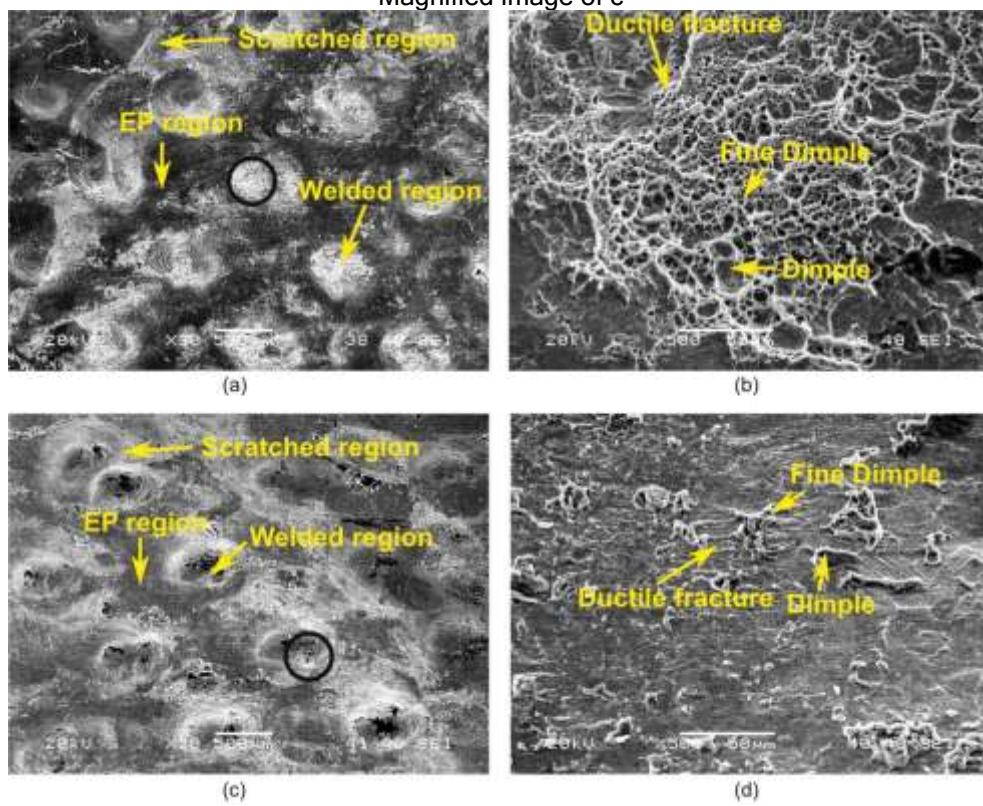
Fractured surfaces of ultrasonic welded specimens in EP surface condition (a) Al side surface with 30X zoom; (b) Magnified image of a; (c) SS side surface with 30X zoom; (d) Magnified image of c
